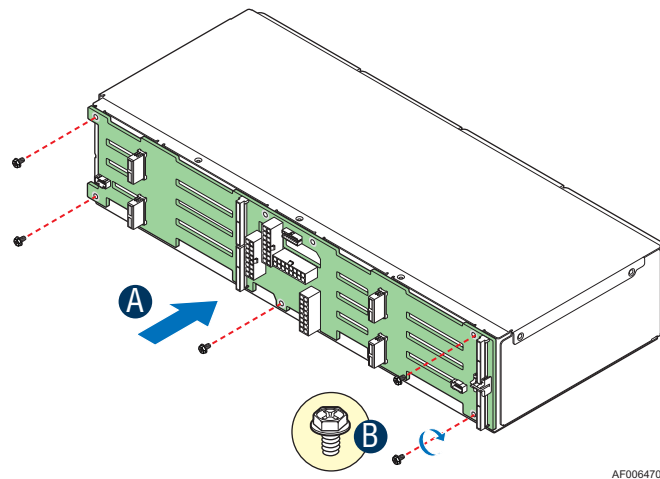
Installing the 2.5" Backplane Board to the Drive Cage
